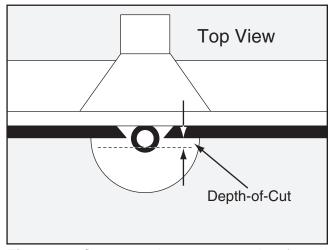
Groove cutting setup, top view (guard removed for clarity).
